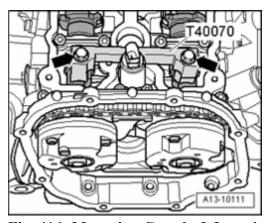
Mounting Camshaft Locating Tool T40070 To Both Cylinder Heads And Tightening Bolts Courtesy of VOLKSWAGEN UNITED STATES, INC.
